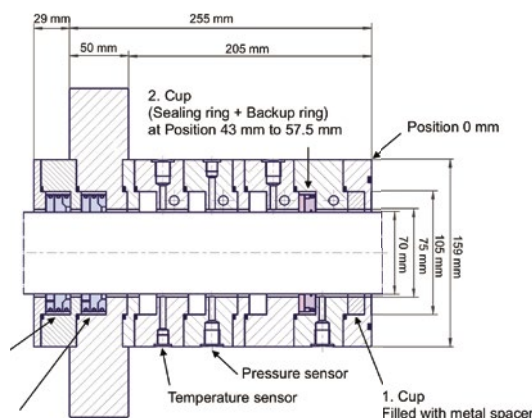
Test machine and high pressure packing housing with single sealing ring. The actual test section is the right hand side (red) section. Single sealing ring with backup ring against ~30 bar (right) and 2 leakage gas rings (0.5 bar) (right).
